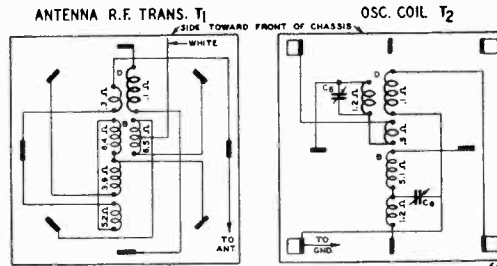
R.F. and Oscillator Coil Base Terminal Arrangement and D.C. Resistance of Windings
